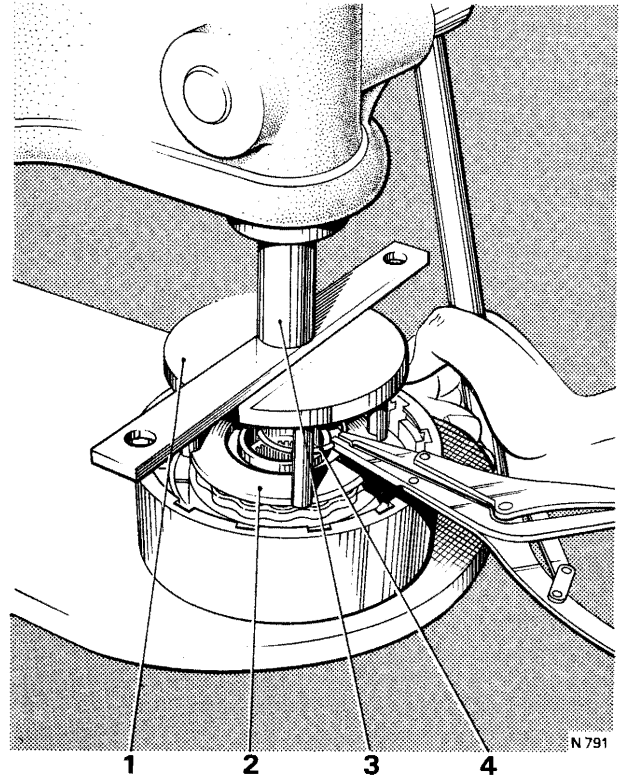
REMOVING AND FITTING THE FORWARD CLUTCH HOUSING SNAP RING
